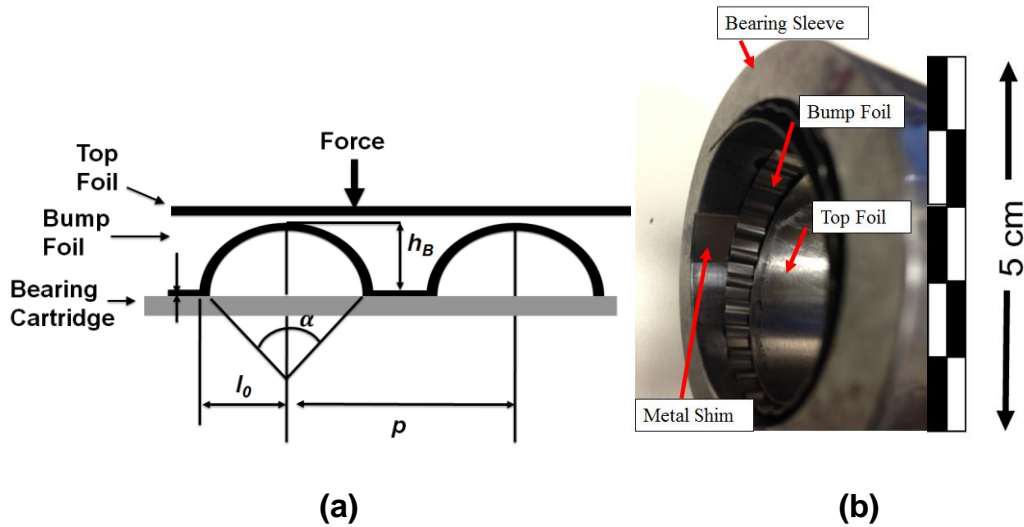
(a) Schematic of bump foil with dimensional parameters [7], and (b) a photograph of a BFB with a metal shim layered axially through the bearing.
